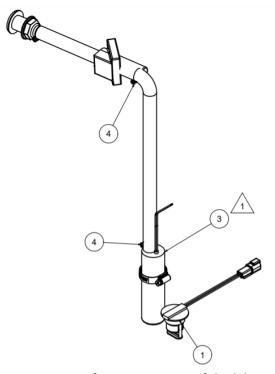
Left isometric view of the bilge pump assembly, which shows float switch (1), bilge pump 24V termination (3), and 5/8" clamp (4).
